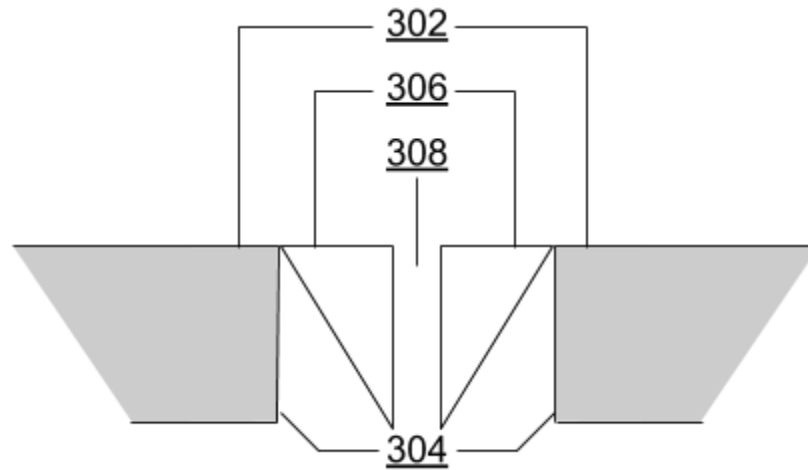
Sectional view of cylindrical desk hole with conical grommet
